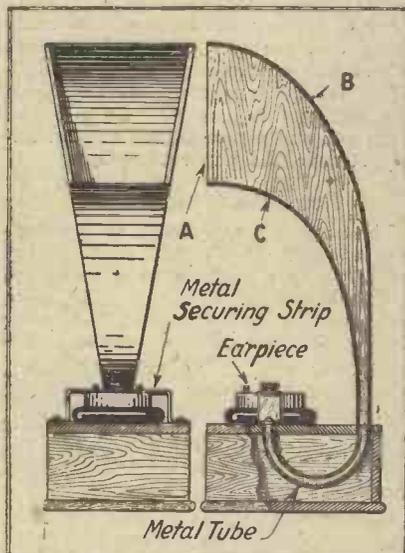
An assembly of the constructed horn and box in conjunction with a telephone earpiece will produce a loud-speaker giving reasonable volume and purity.
